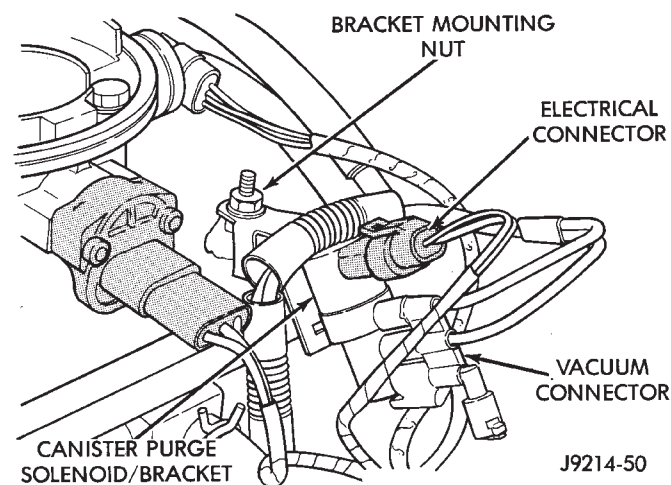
EVAP Canister Purge Solenoid—5.2L Engine
